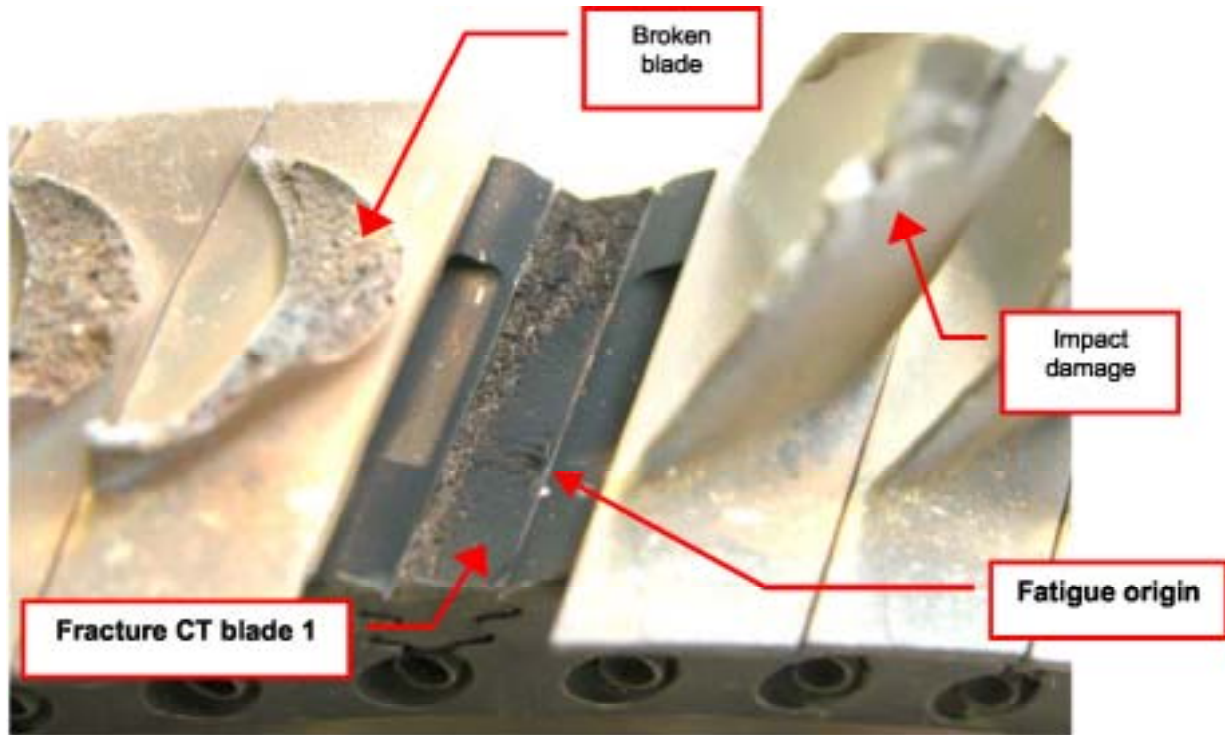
Photograph of the subject CT turbine blade assembly showing the fracture surface and the fatigue crack origin (Labelled) on CT blade 1. Also note that the remnant of the trailing edge of the adjacent CT blade was bent in the direction of impact (labelled).
